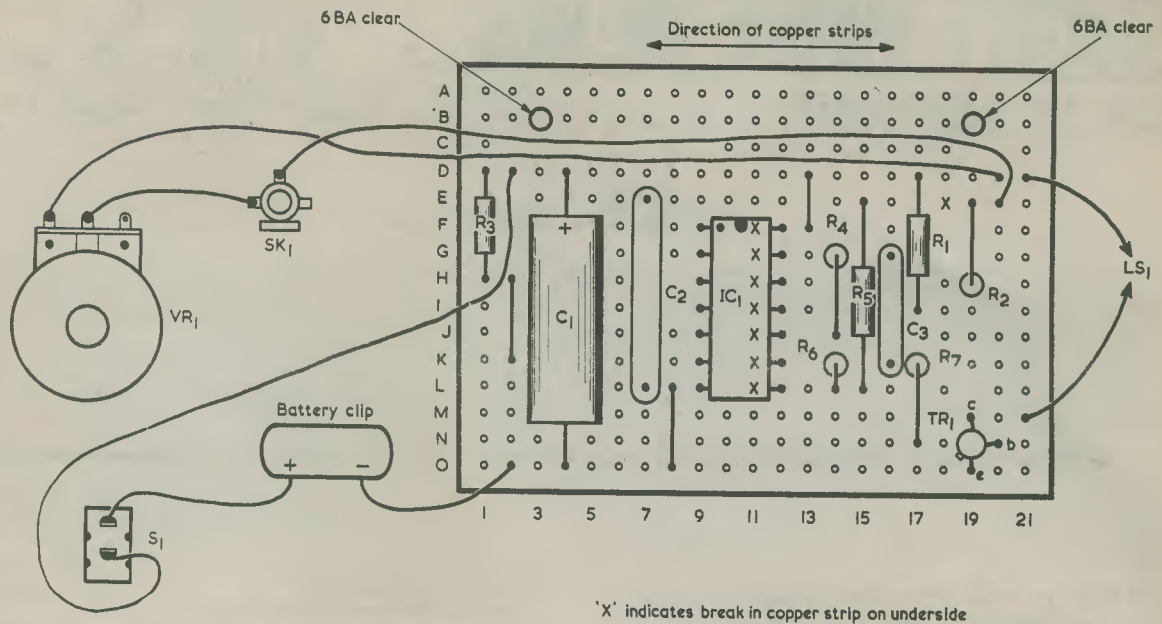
Component layout on the Veroboard module. Also shown here is the wiring to the remaining components
